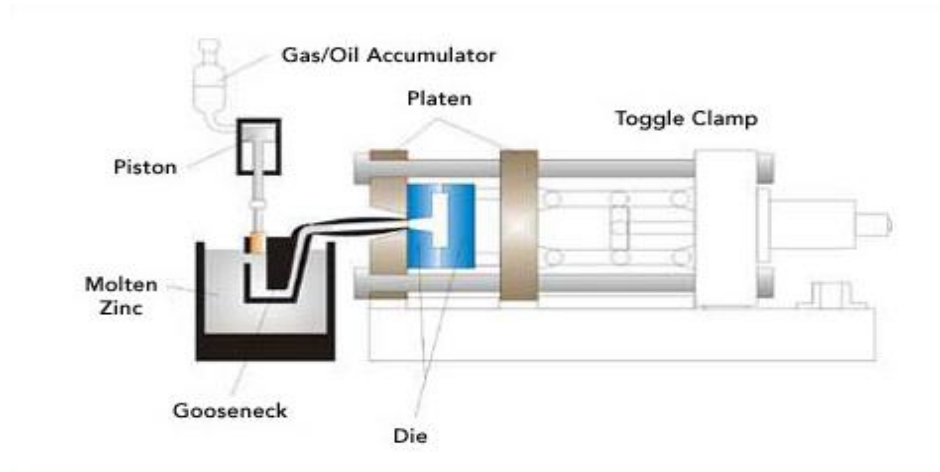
(HOT CHAMBER DIE CASTING) [4]
